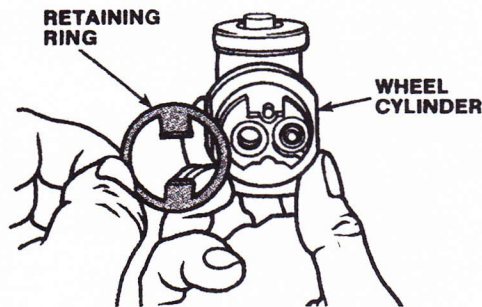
Example of a wheel cylinder retaining ring.
